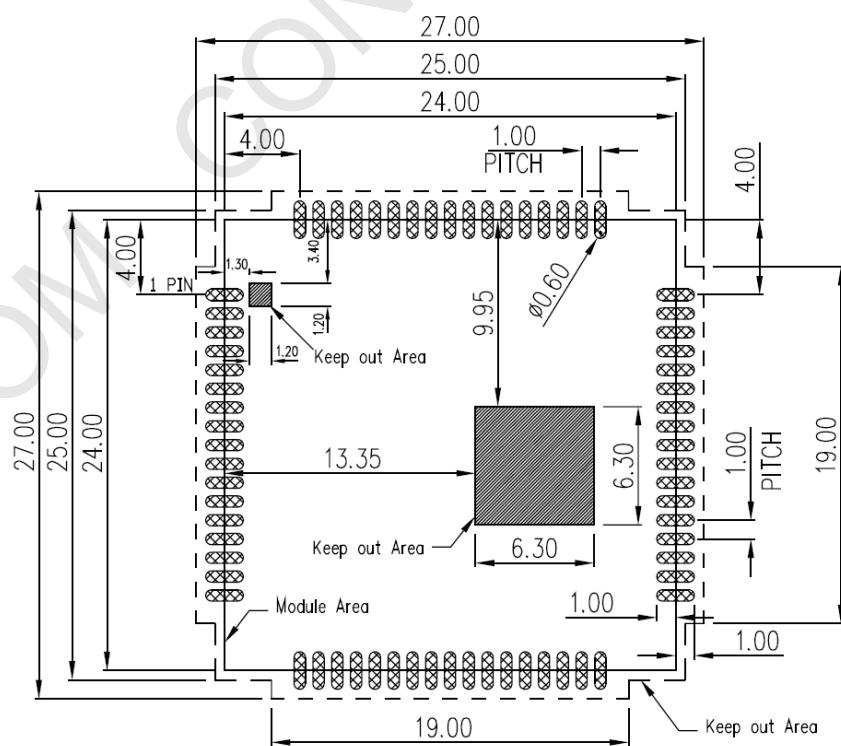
SIM5300EA Recommended PCB footprint outline (Unit: mm)
